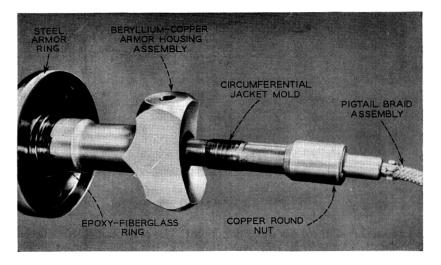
8B coupling completed assembly of jacketed coaxial.
